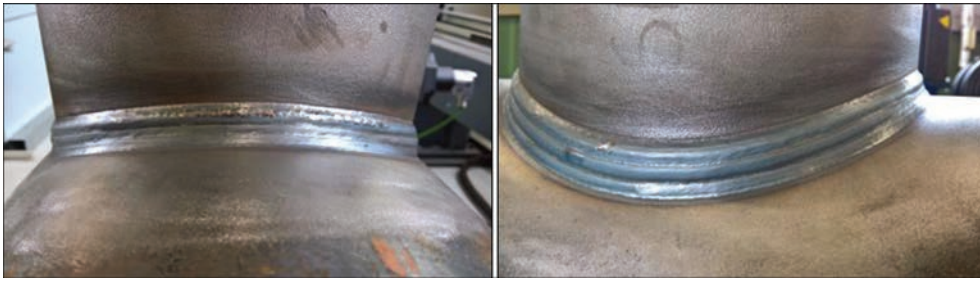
Tube node weld, T-joint (cover layer)
